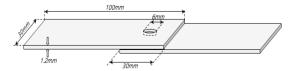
Welding specimen (L (100mm) \times W (30m) \times T (1.2mm))
